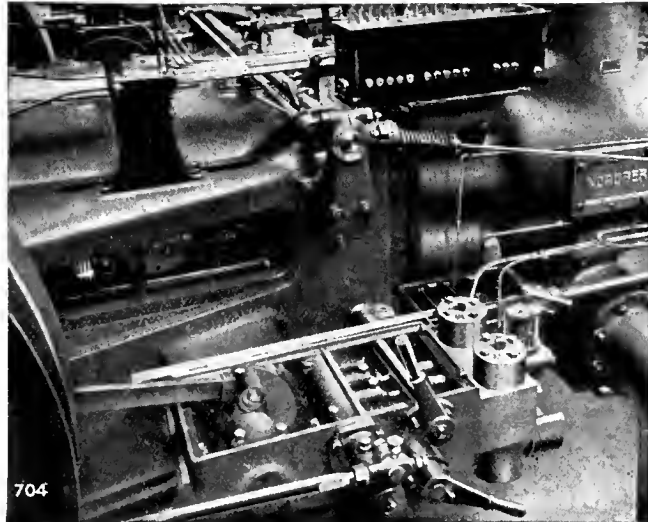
VIEW OF FUEL INJECTION PUMPS, STRAINER TANK AND AIR STARTING GEAR OF "NORDBERG" OIL ENGINE.
